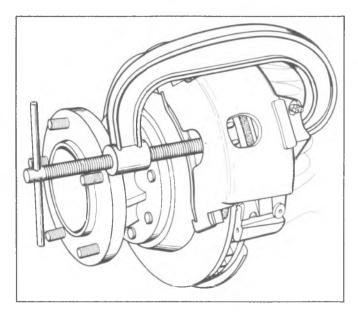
Pushing Piston into Bore Using a "C" Clamp
